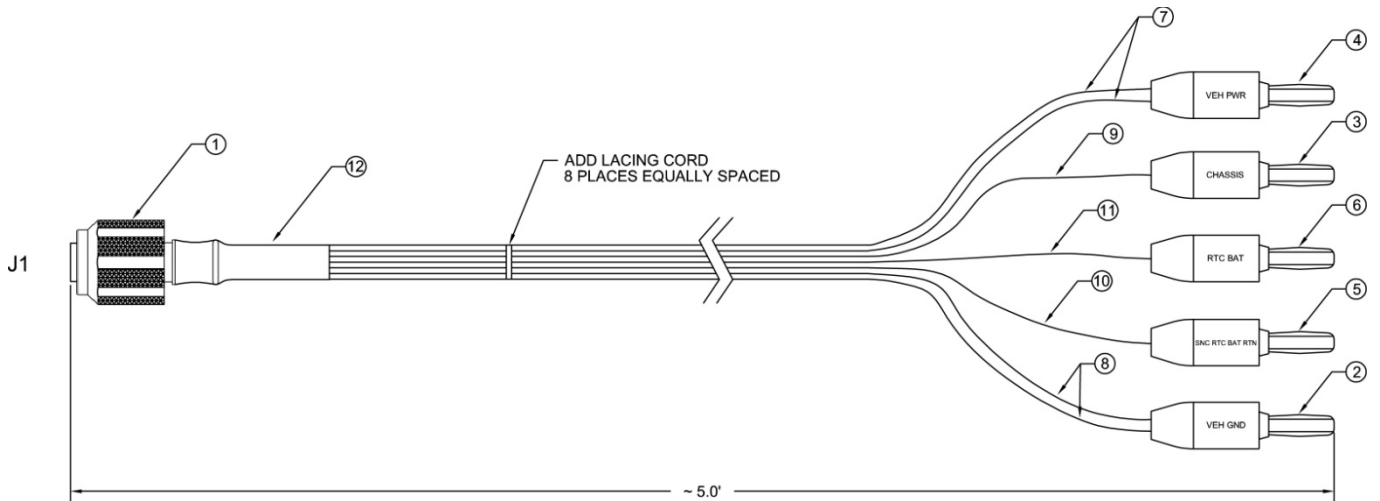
P1 – Power Cable Assembly DDC-81249-1
